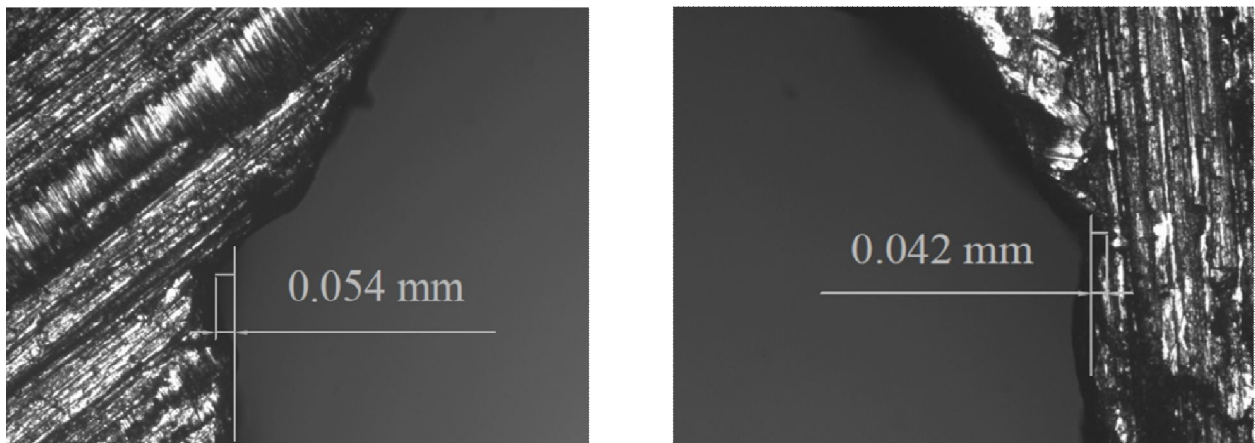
Defects present at the weld toe (untested specimens)
